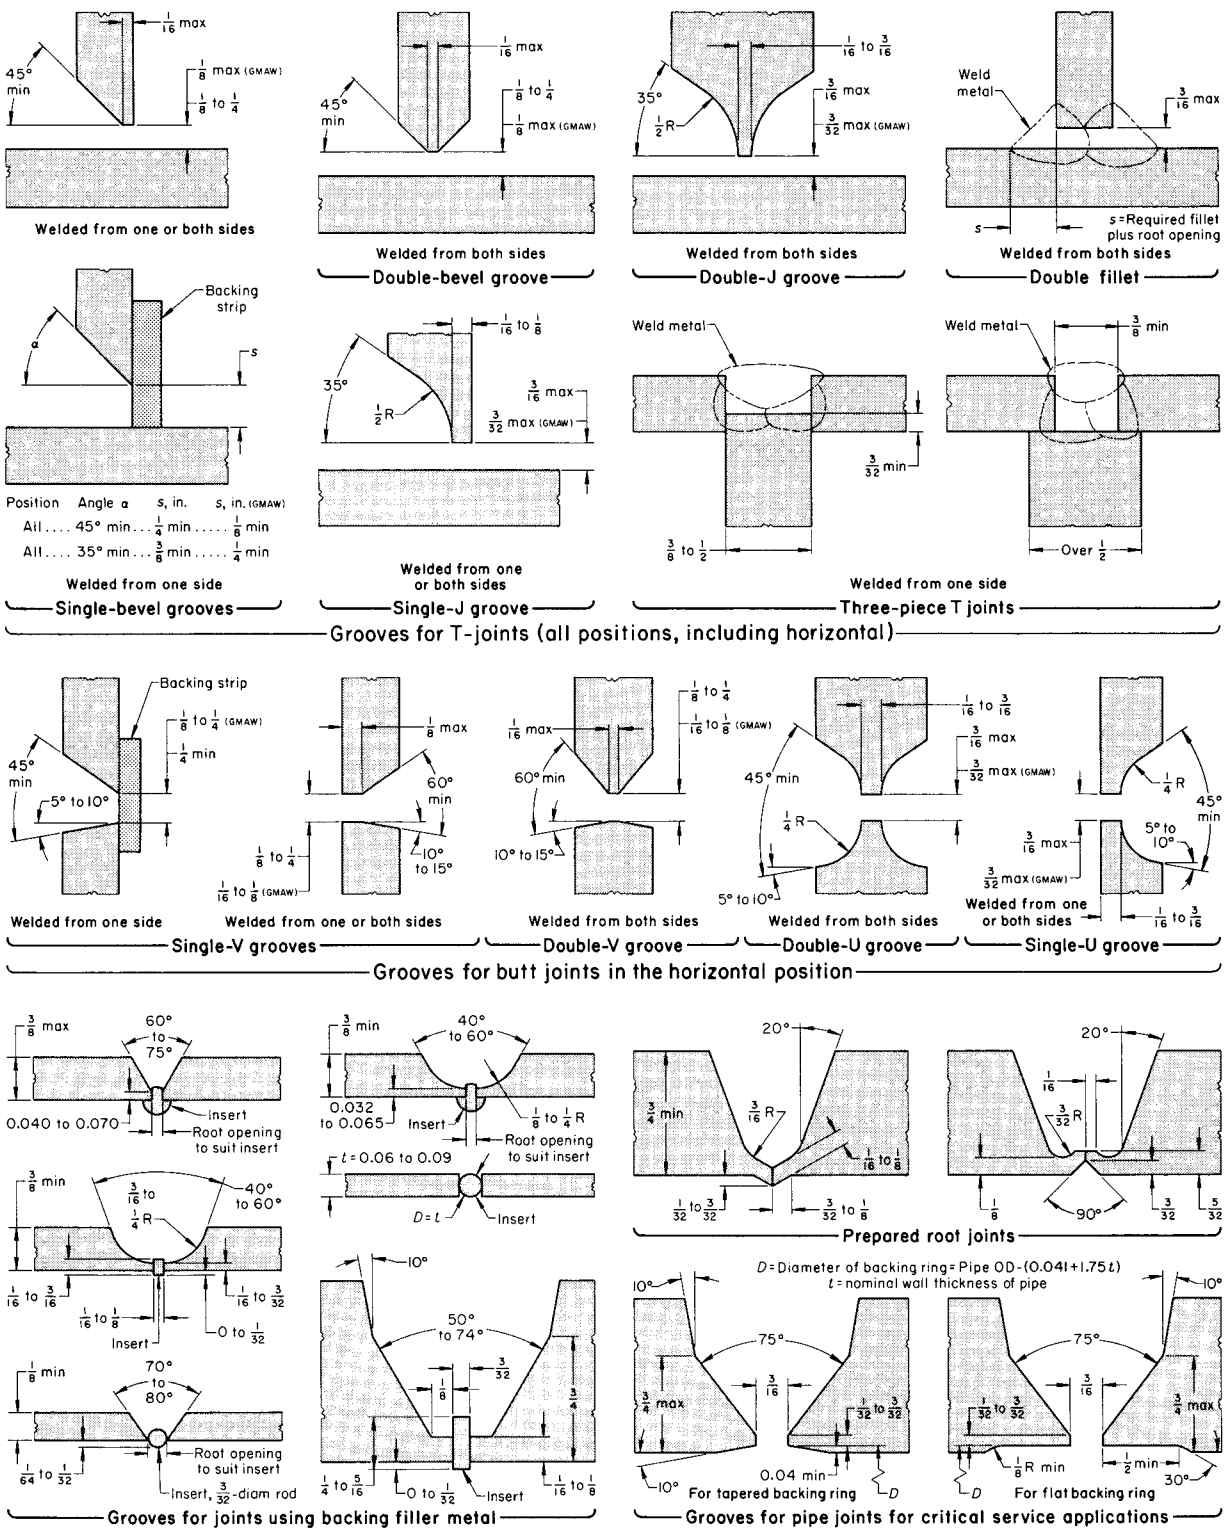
Recommended proportions of grooves for T-joints and joints for specific applications. Made by shielded metal arc welding, gas metal arc welding, gas tungsten arc welding, and oxyfuel gas welding (except pressure gas welding). Dimensions for specific welding processes are noted.
